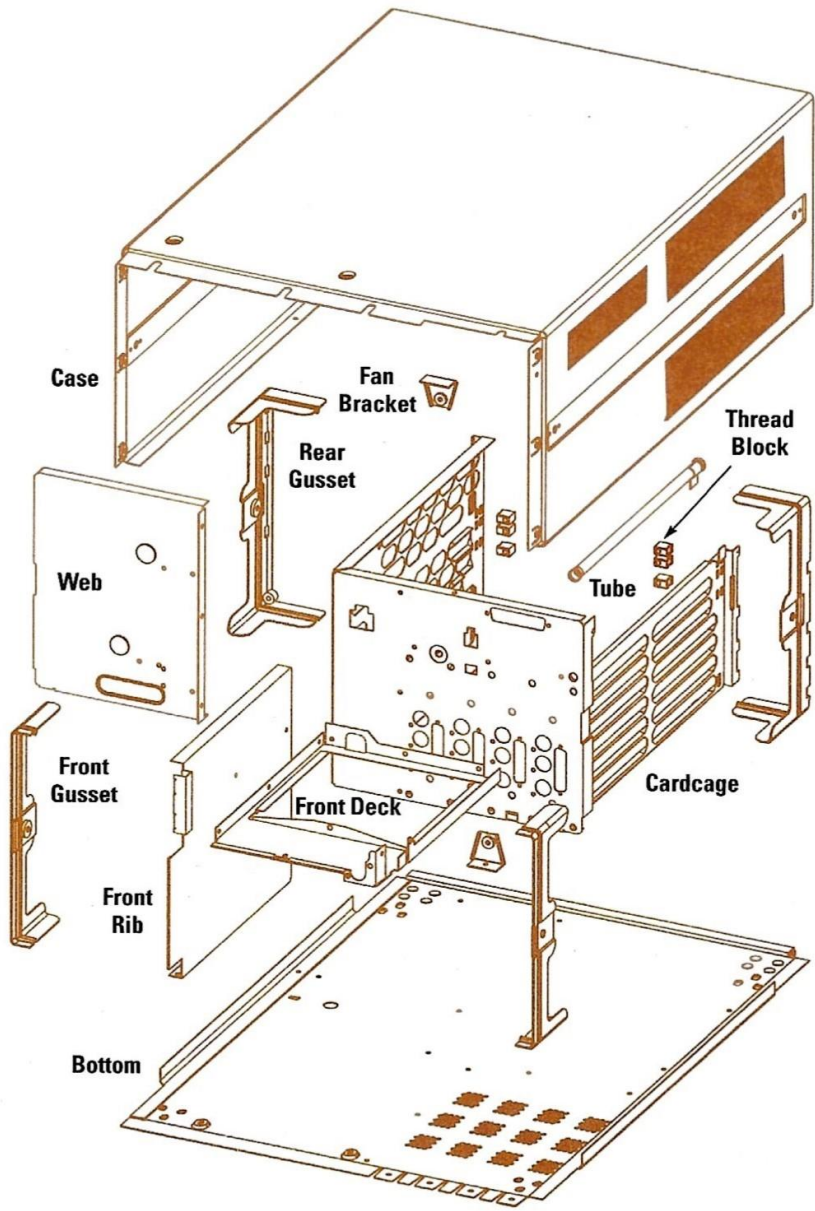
Nineteen parts are welded by the supplier to complete a cabinet ready to accept circuit boards and other components. The vertical plane of sheet metal at the center of the drawing is the bulkhead, which establishes the z location of the plug-ins.
